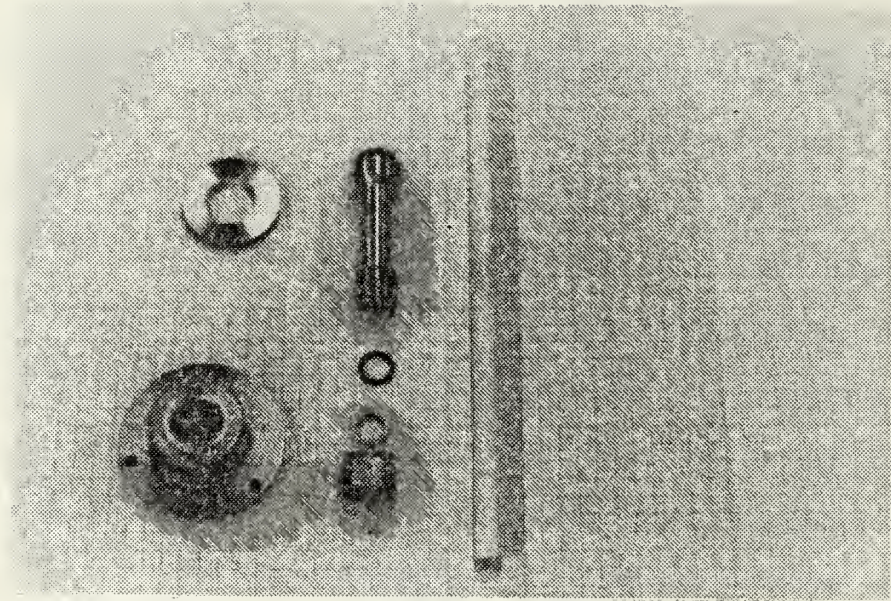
EXPLODED VIEW OF BALL-JOINT PROBE MOUNT
